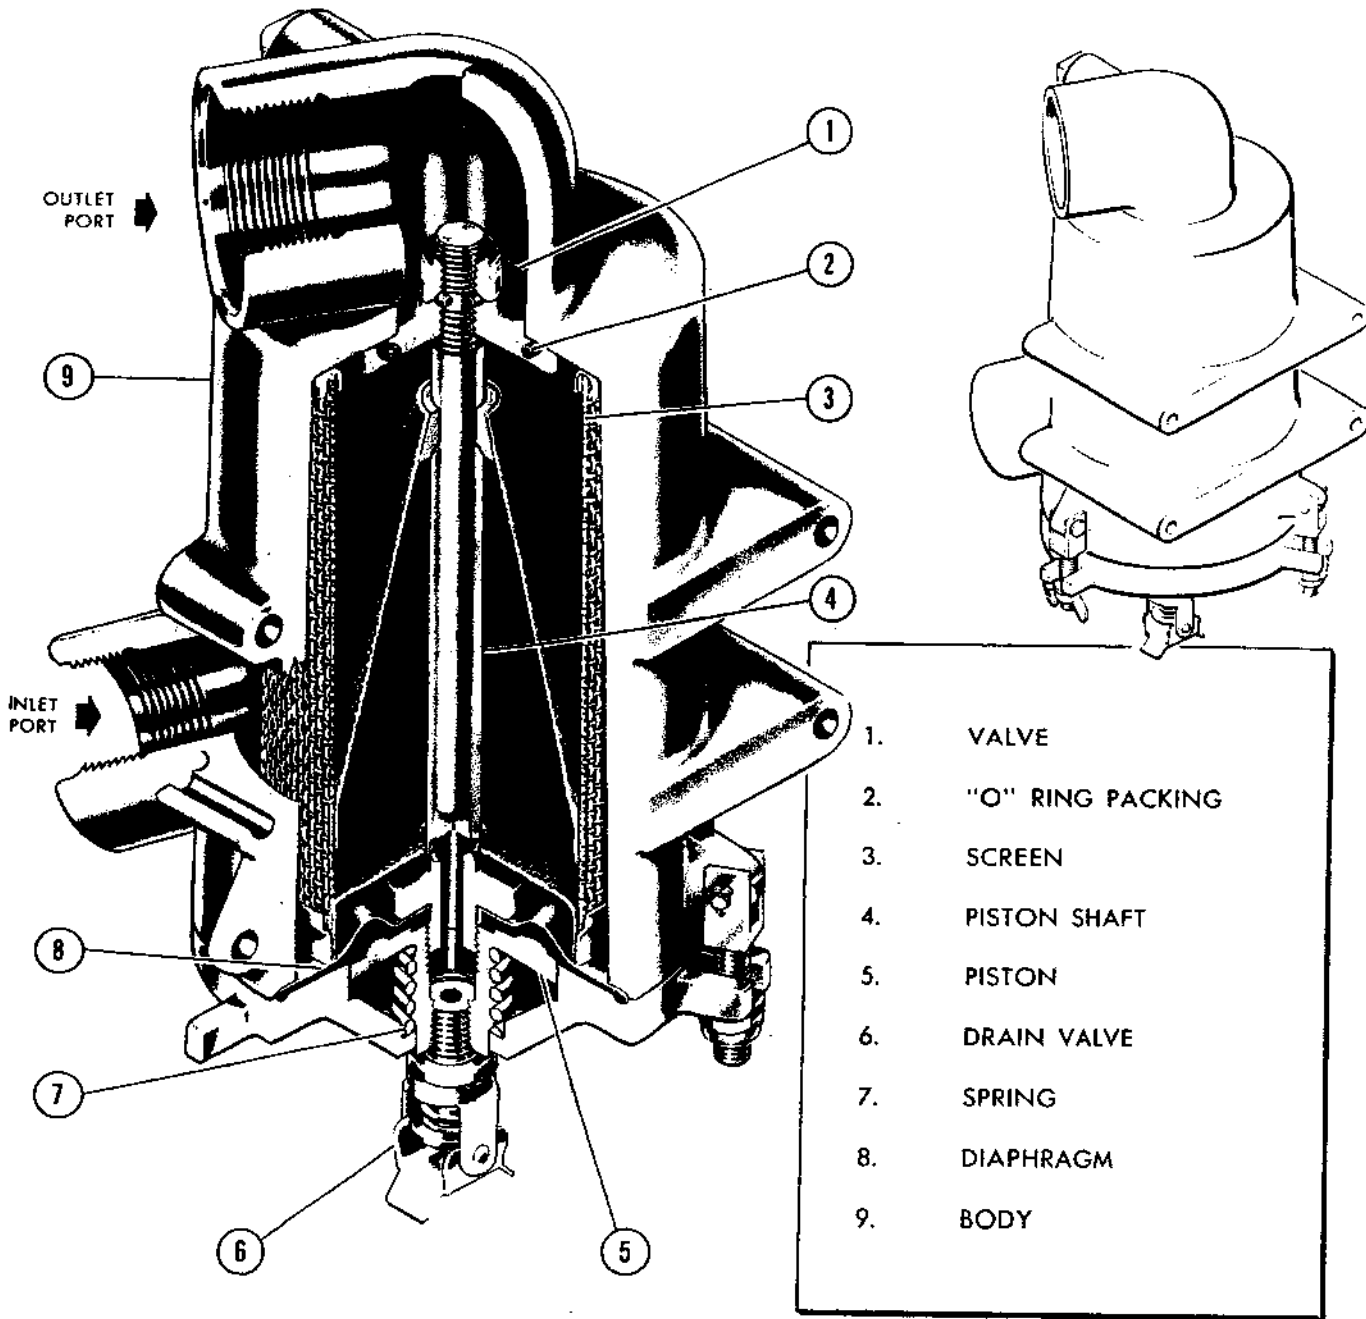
D — Fluid Injection Shut-off Valve and Strainer
